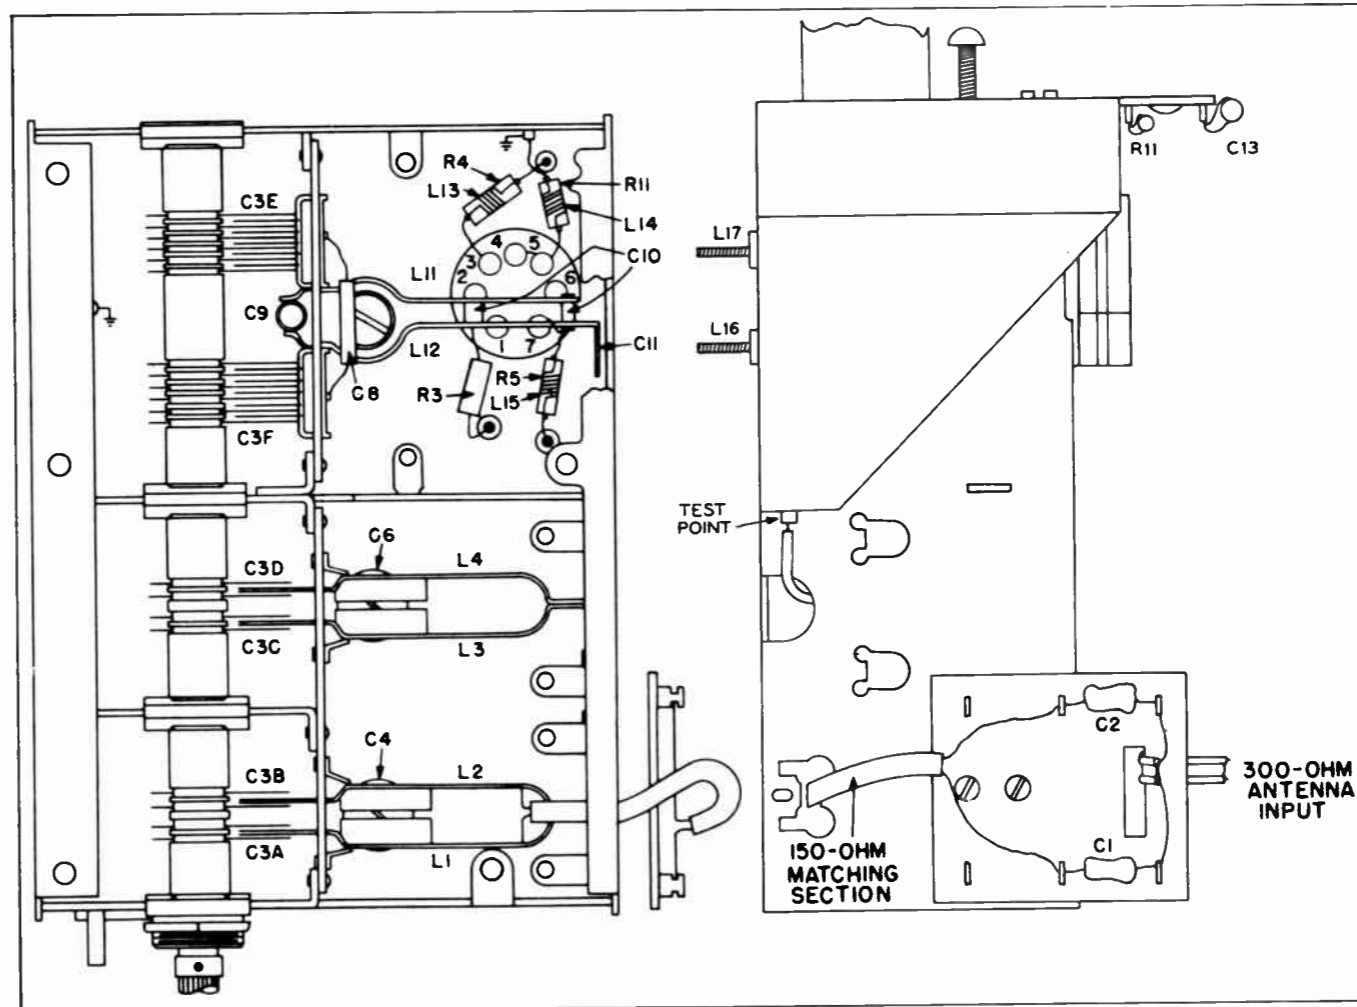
Side View and Base View of Tuner-Adapter Part No. 43-6474, Without Board Assemblies
